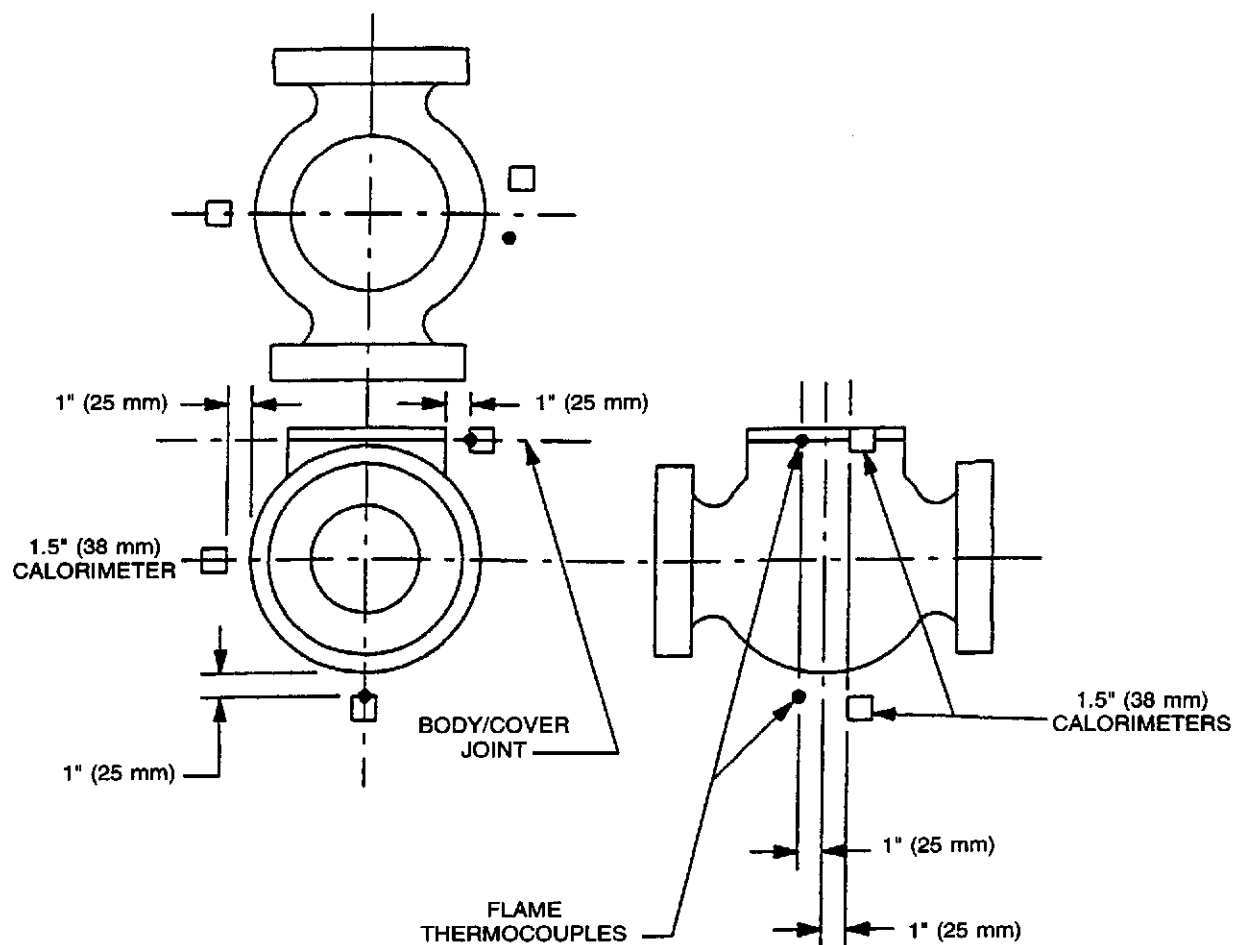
Location of Thermocouples and Calorimeters—Larger Flanged Check Valves
